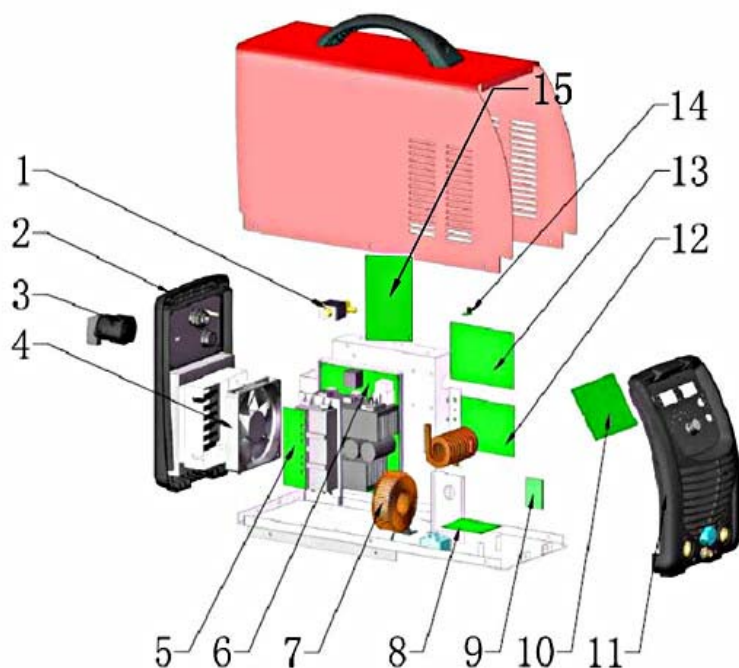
Spare parts drawing CRAFT-TIG 253 DC PULSE
